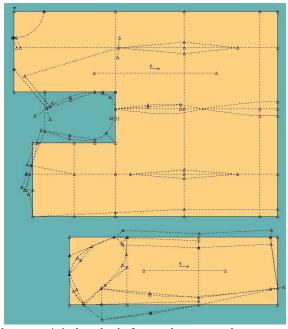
Pattern making of the women's jacket - back, front and two seam sleeve
